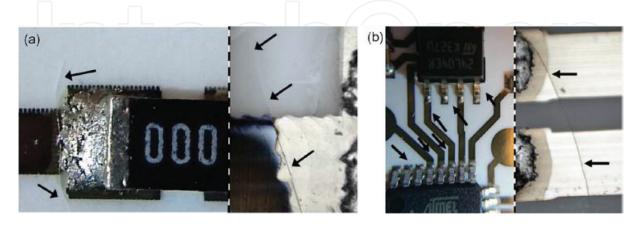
(a) Cracks left on the paper coating, on the printed lines and at the soldering, indicated by arrows, for a 0805 packaging component (b) similar issues for QFP and SOP packages, showing that the problematic is insensitive of packaging type and, up to a certain extent, size insensitive. Image adapted from [39] with authorization.
